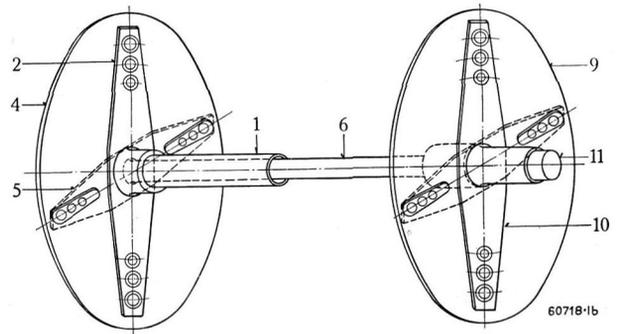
Disc drive comprising two flexible steel discs with four carriers and cardan shaft (view from pinion shaft).
